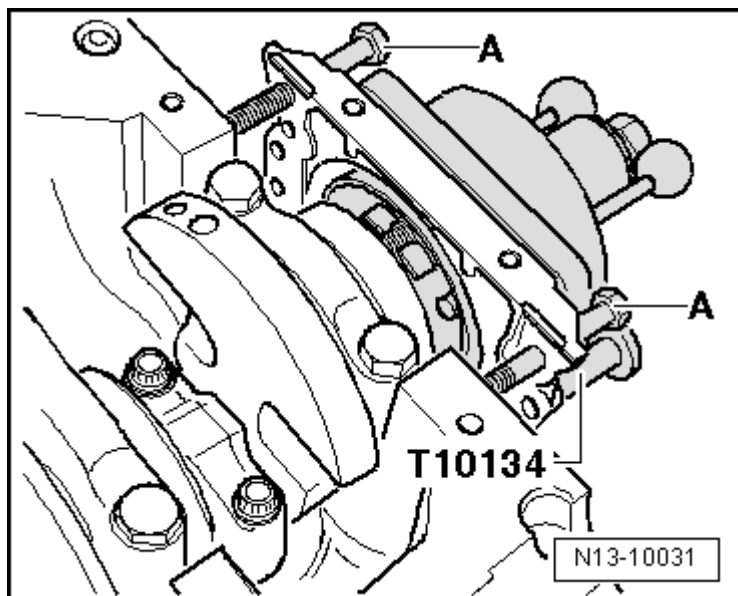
Identifying Bolts Screwed Into Cylinder Block To Guide Sealing Flange
